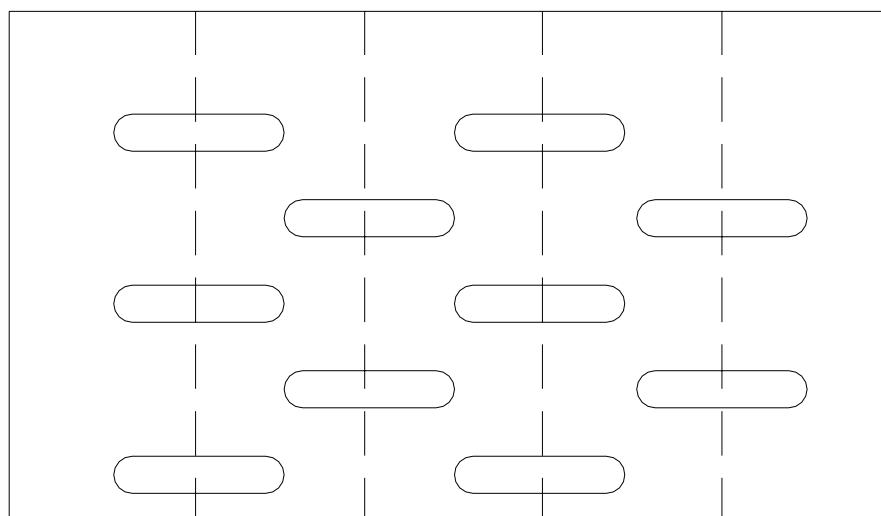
Sketch showing the positions of the Tube Plate cut lines
